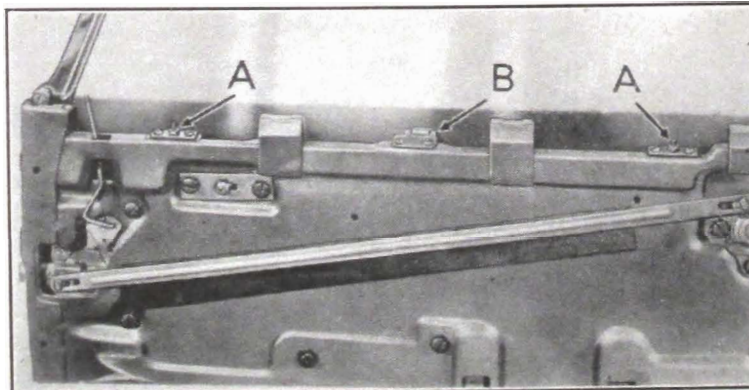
Window Glass Adjustments on Door Inner Panel
